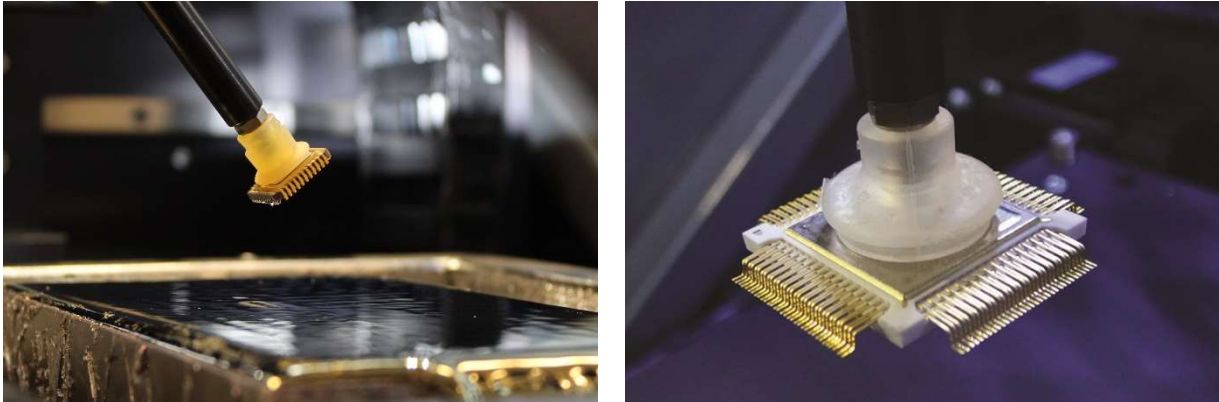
Quad flat pack (QFP) device during re-tinning (left), and QFP held with vacuum nozzle (right)
